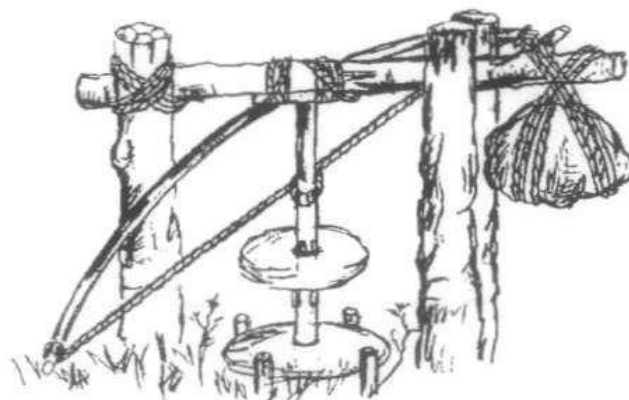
A Stone „Machine-Tool”, to drill hole on object, with drill and flywheel, driven by bow. The counter weight to press the drill (STRANDAH and SIGVAD, 1979)
